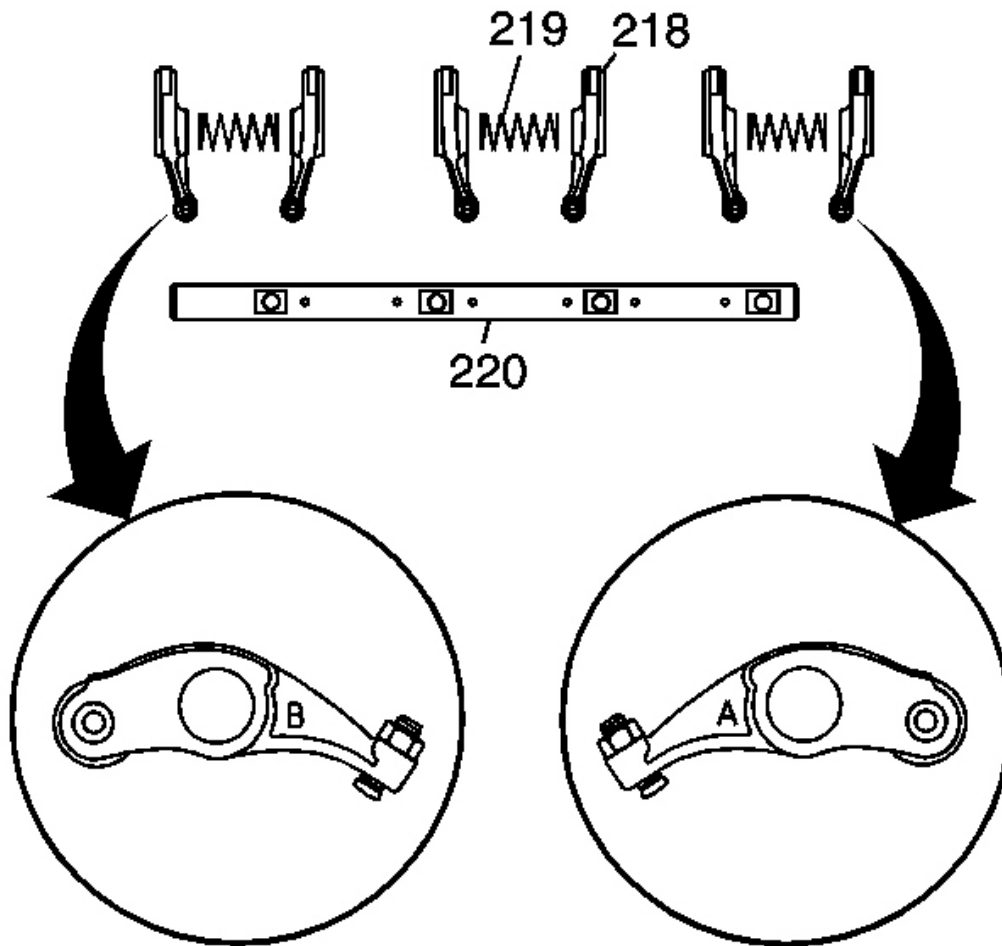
View Of Exhaust Valve Rocker Arms & Springs Onto The Shaft
